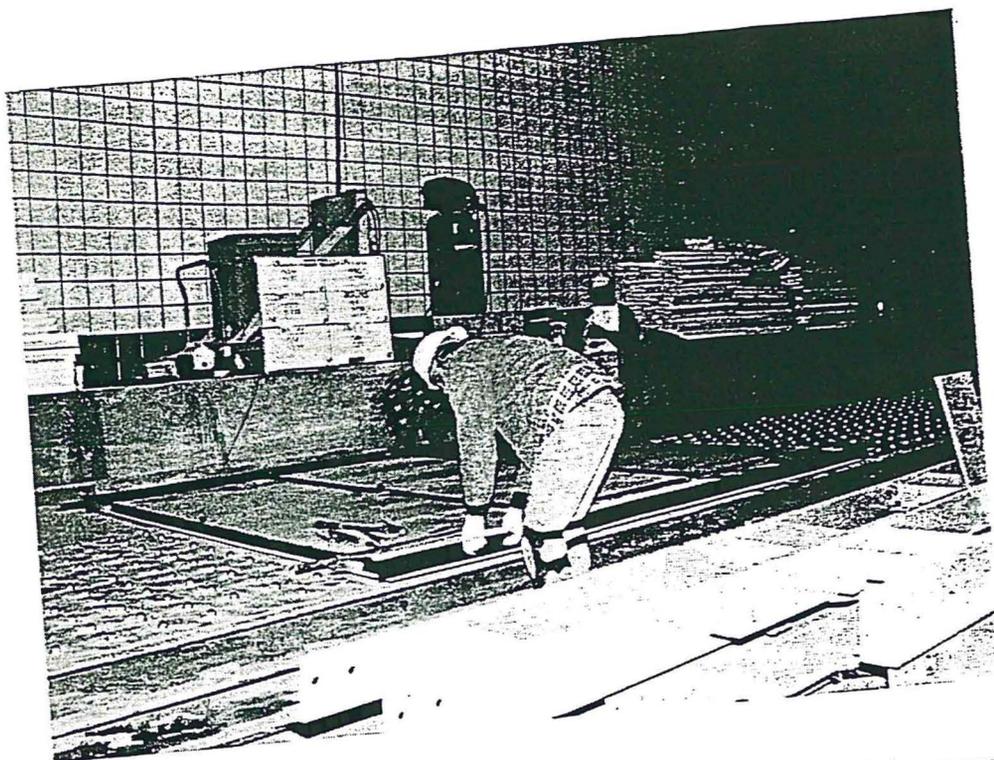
Gluing the gaskets onto the sub-module during sub-module assembly.
